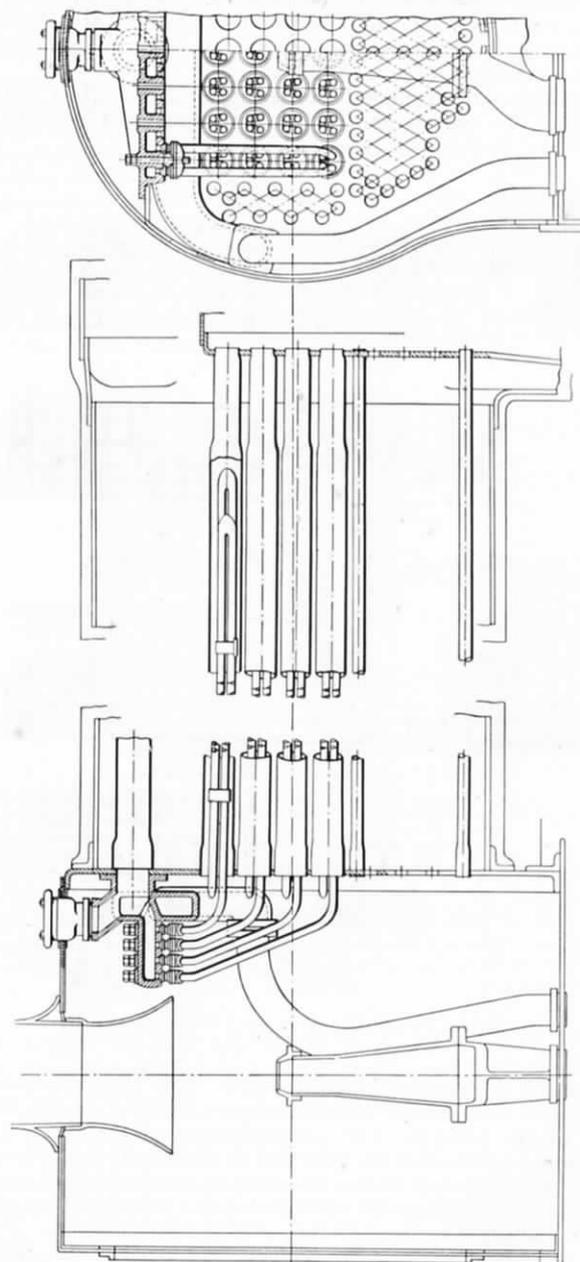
GENERAL ARRANGEMENT OF SMOKETUBE TYPE SUPERHEATER WITH BALL-JOINT ELEMENTS AND VACUUM RELIEF VALVE.
